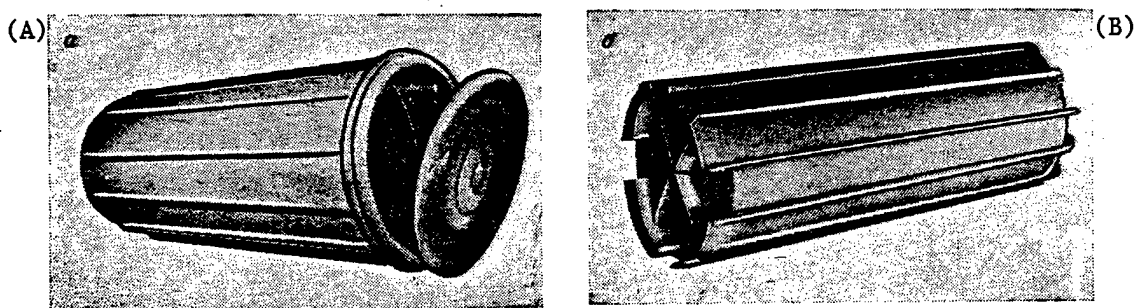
Polyethylene Containers: (A) Cast, and (B) welded
